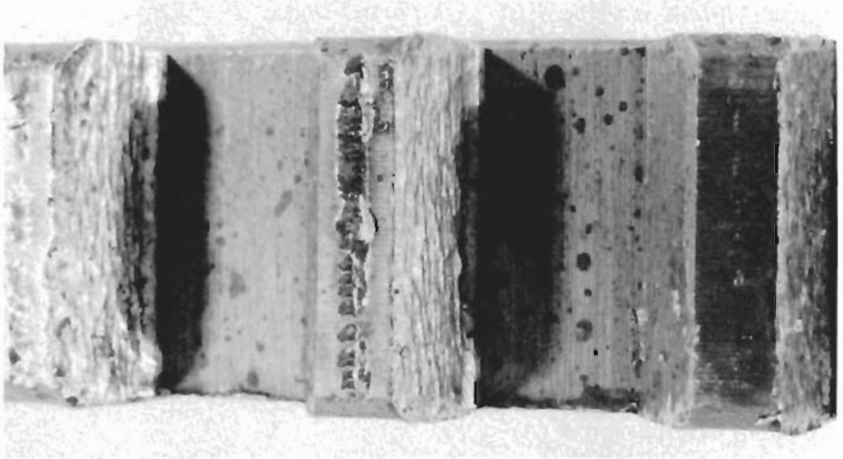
A hub spline that permanently fitted into a wheel gear. Vibrations advancing to chatter, along with foreign particles, set up a destructive wear condition.
